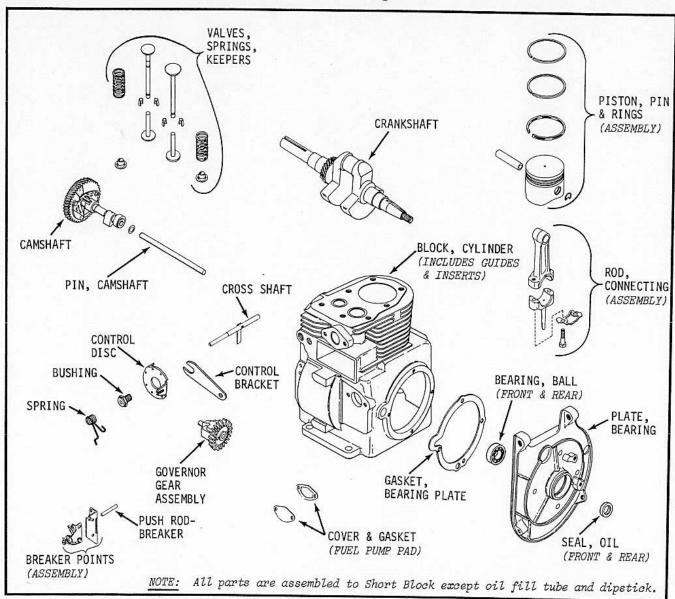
COMPONENTS OF A TYPICAL SHORT BLOCK ASSEMBLY
